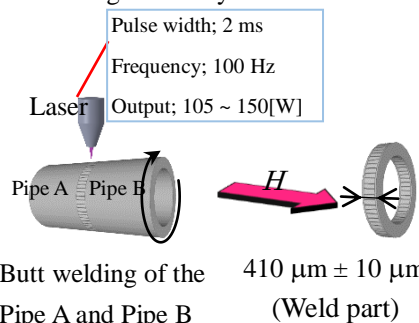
Manufacture of magnetization measurement sample in laser welding joint of SUS304 pipe
